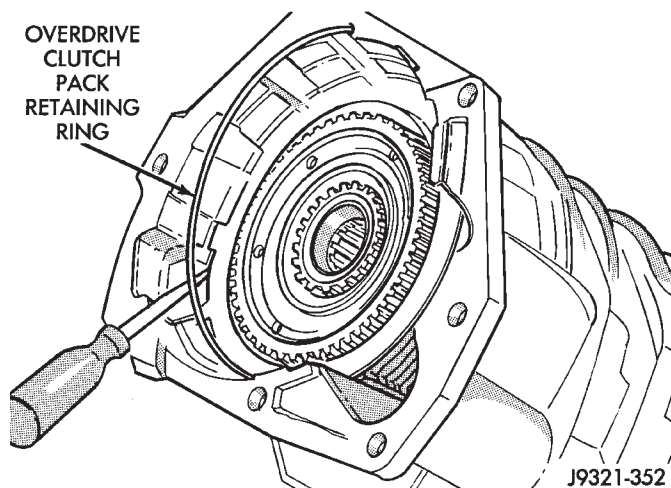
Removing Overdrive Clutch Pack Retaining Ring
